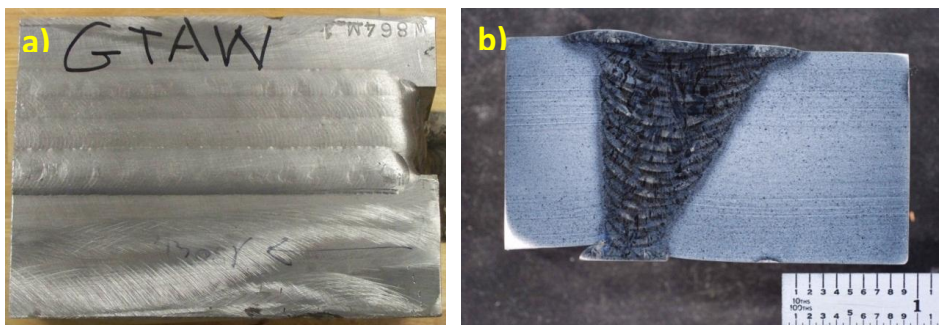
Views of the sample CIEMAT GTAW: a) broad weld from above and b) the sample which is a transversal cut of the weld.
